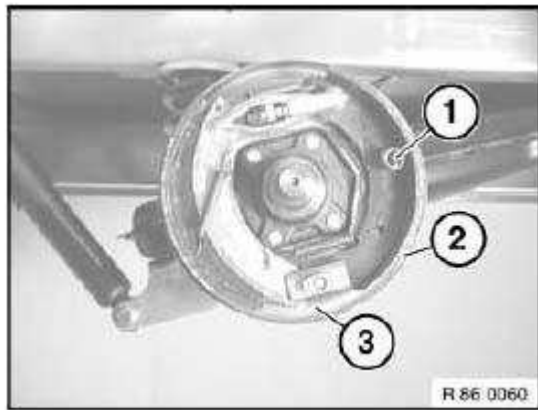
Identifying Pressure Spring & Fixed Brake Shoe
